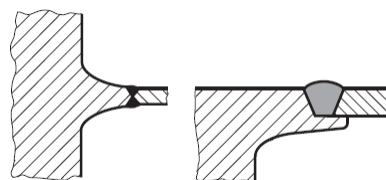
Welding flange on steel castings or forgings
